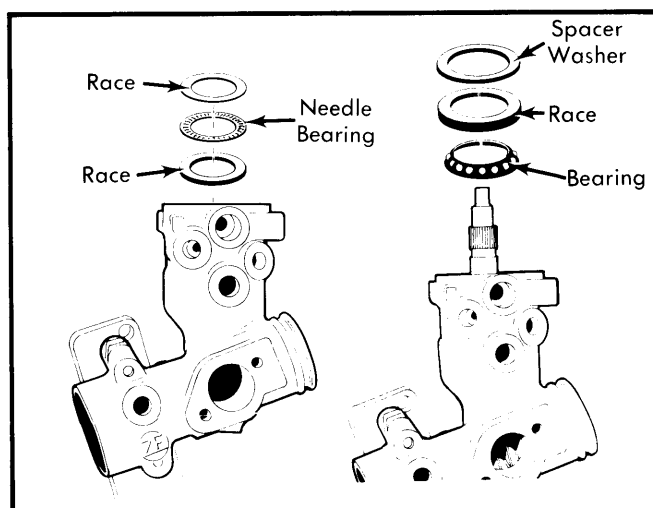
Installing Pinion Bearings and Races. Race is Installed With Bevelled Edge Down
